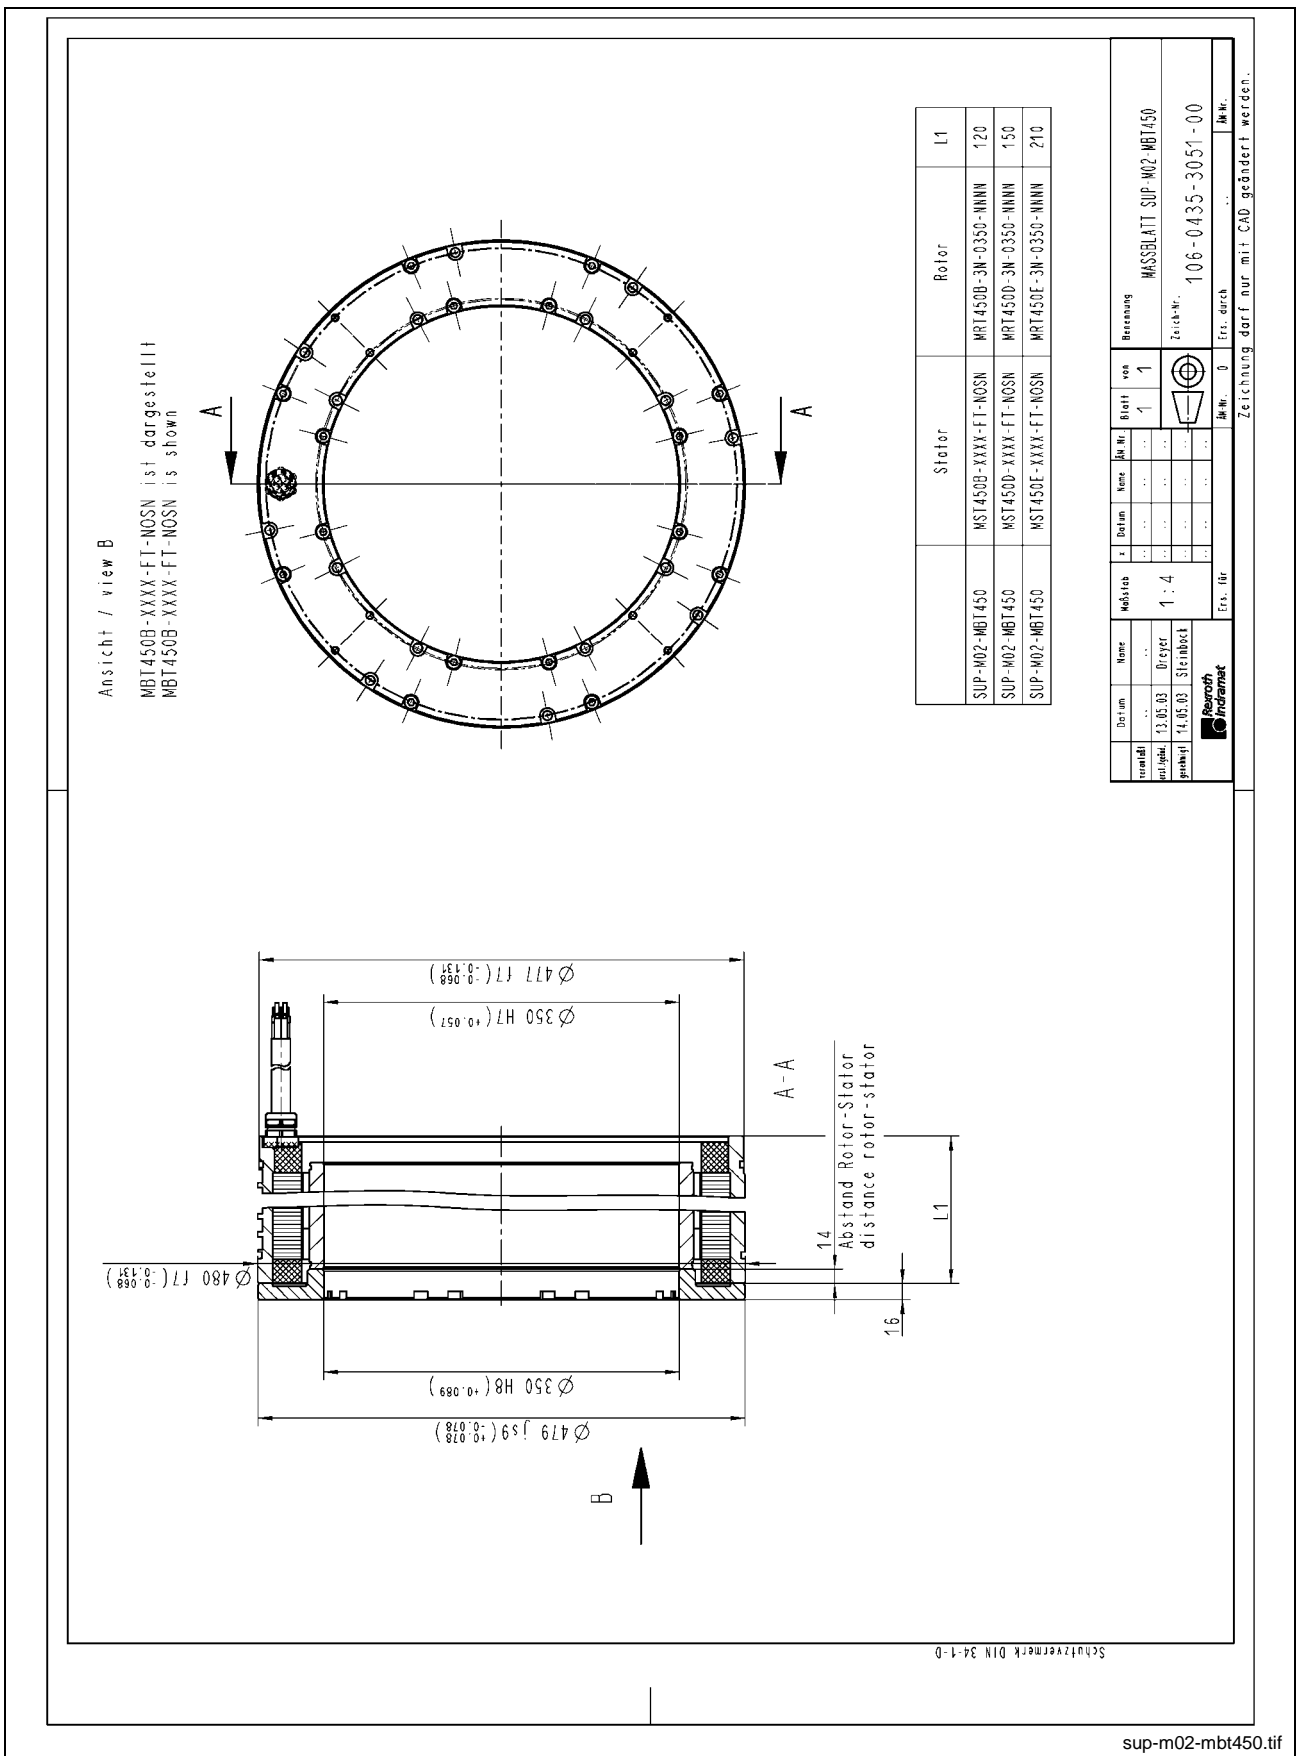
Dimension sheet for mounting ring in SUP-M02-MBT450
